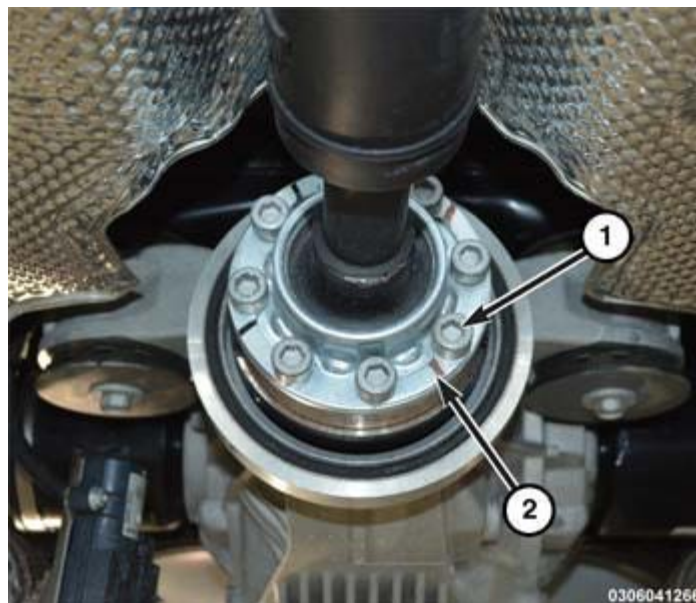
Drive Shaft To Axle Flange Bolts & Washers
